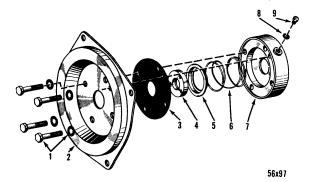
Assembly of Mounting Ring, Gasket and Piston Rod Seal to End Plate
